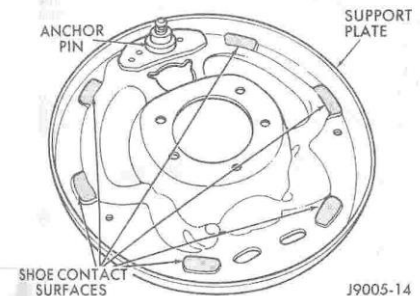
Shoe Contact Surfaces-9 Inch Brake Support Plate
